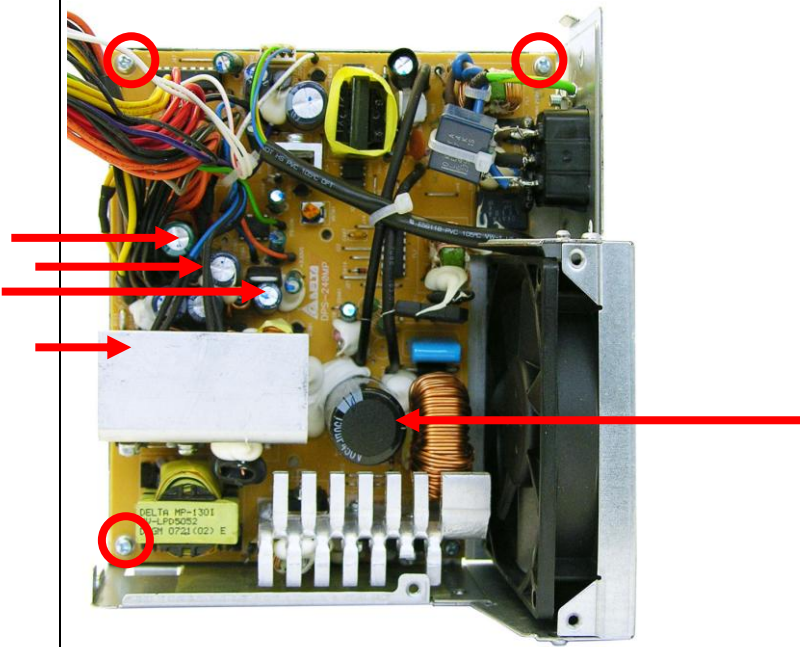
POWER SUPPLY 6: PCA screw locations; Capacitors (4) to cut
